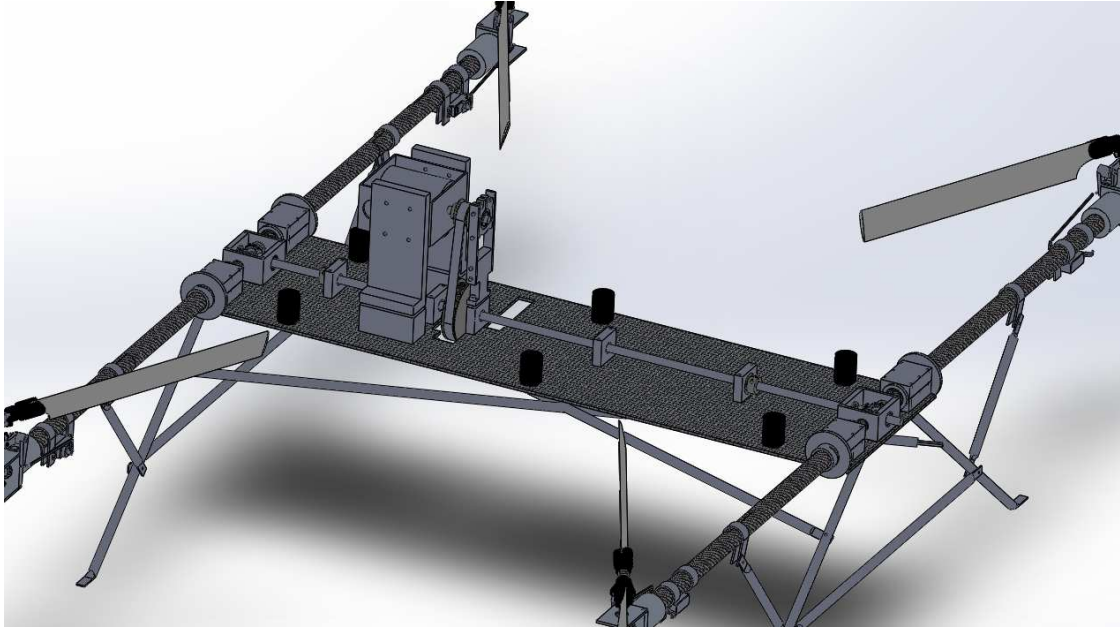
10: A CAD drawing of the internal view of the quadcopter version II
